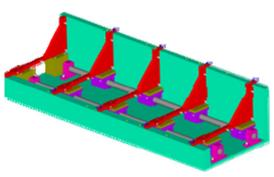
Assembly fixture to locate shelves for assembly of cabinets (pioneer industrial systems LLC.) [21].
